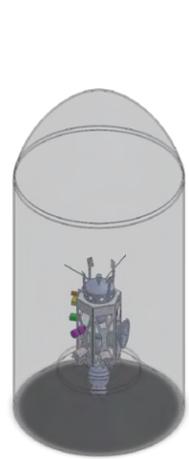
Isometric View of Stowed TES in Fairing
